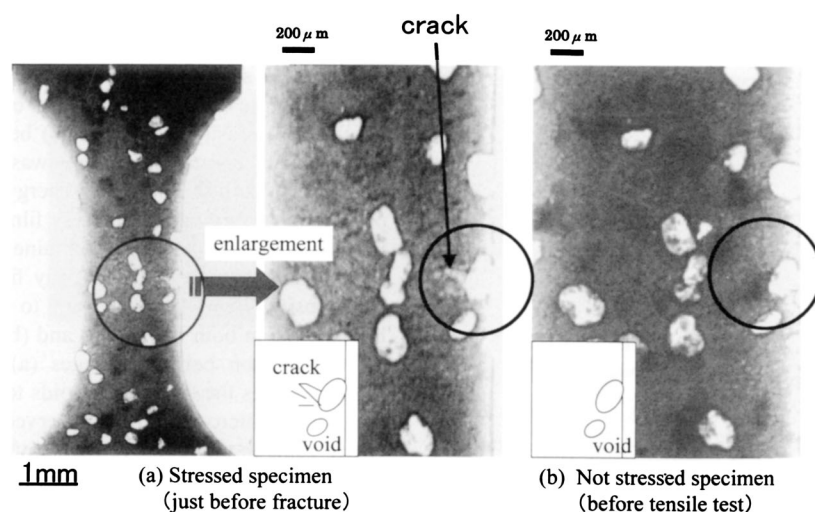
X-ray images of A6063 aluminum casting with porosity (cavity voids) before and after tensile fracture. The *in-situ* experiment was done using tensile test facility at BL24XU hut C of SPring-8.
